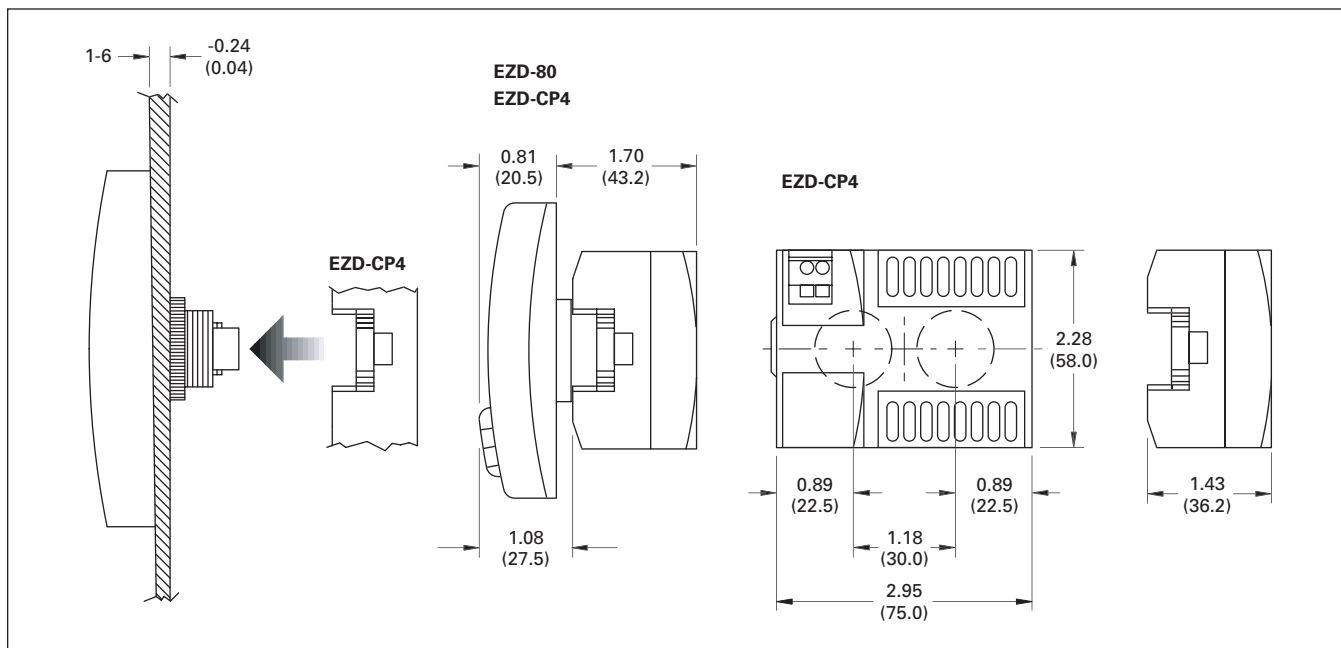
EVD-CP4, EVD-80 and EVD-CP4 Series Combined Dimensions in Inches (mm), Drawing Number MD013013E
